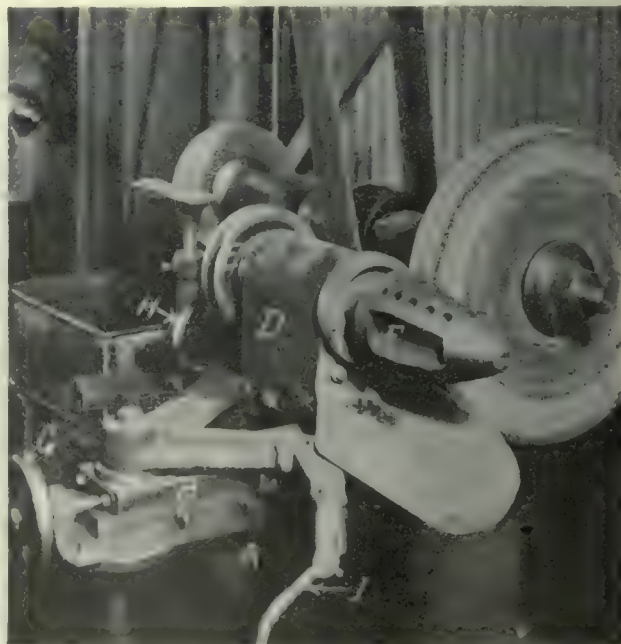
RADIUS GRINDING ATTACHMENT FOR INSIDE PROFILE CUTTER.
